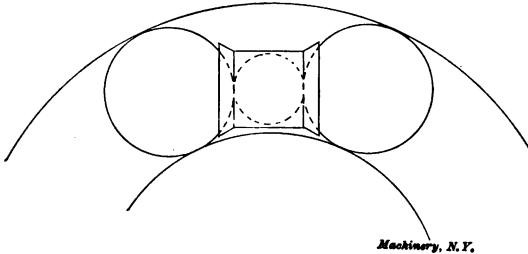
Type of Separator used in the Bearing shown in Fig. 37
